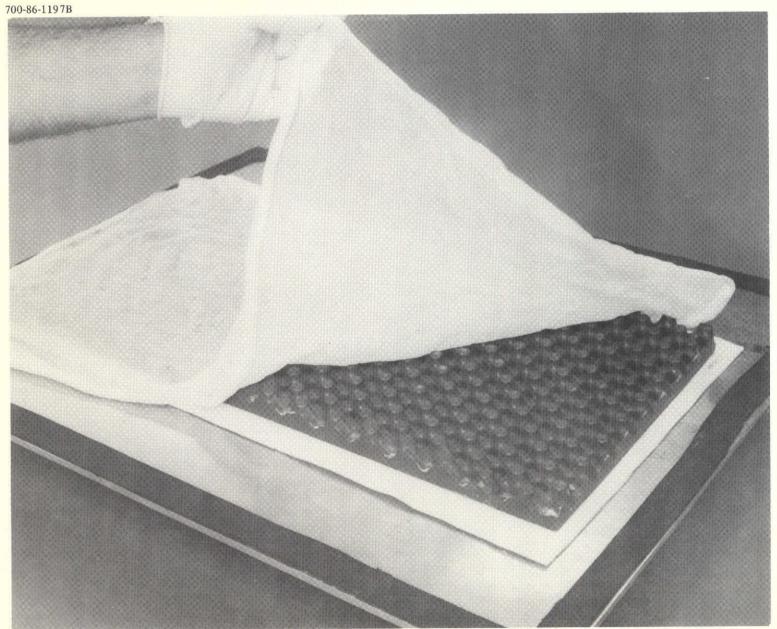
Material Draped Over Vacuum-Forming Tool
